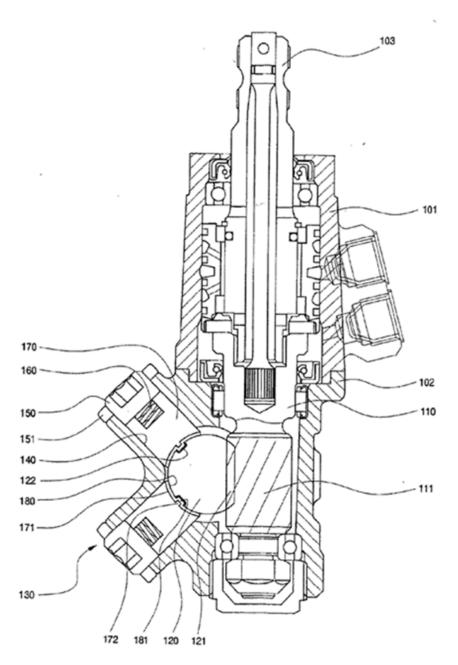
illustrates a rack and pinion gearing including a rack (120) which is biased against a pinion gear (111) using two yokes (170) and respective springs (160).
